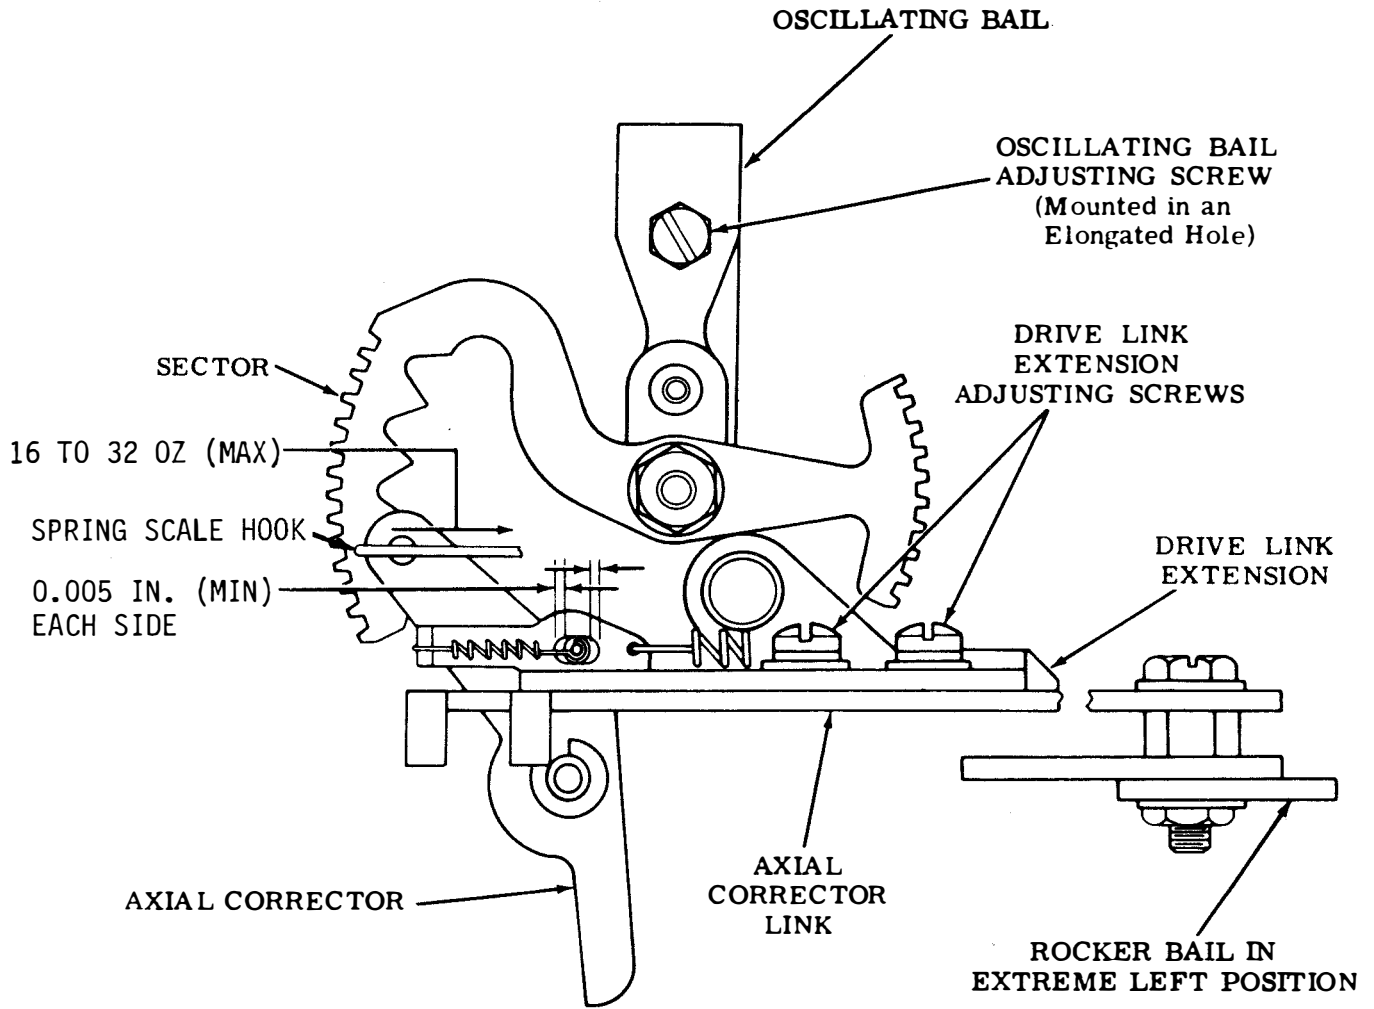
Corrector Drive Link Extension Spring and Axial Corrector (Yielding)
